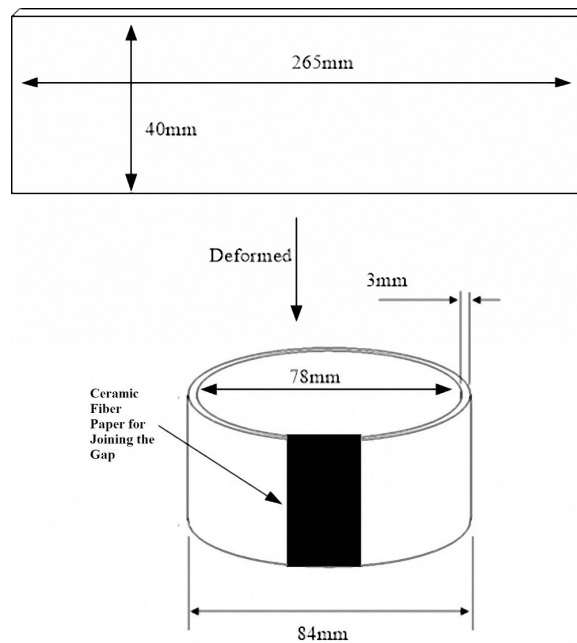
Preparation process of the brass cylinders; brass sheets cut to 265×40×3 mm size and deformed to a cylindrical shape using asbestos and steel wire.
